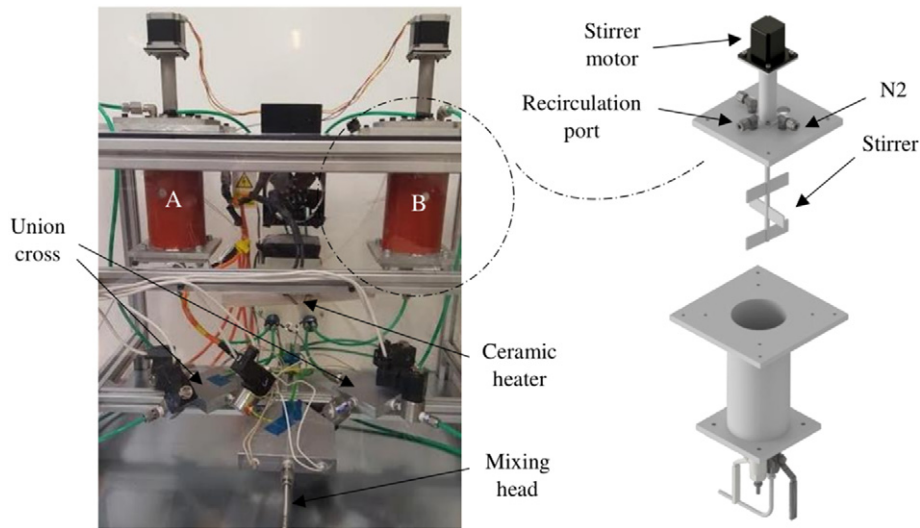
TP-RTM machine components with a view of the tank parts with the top removed.
